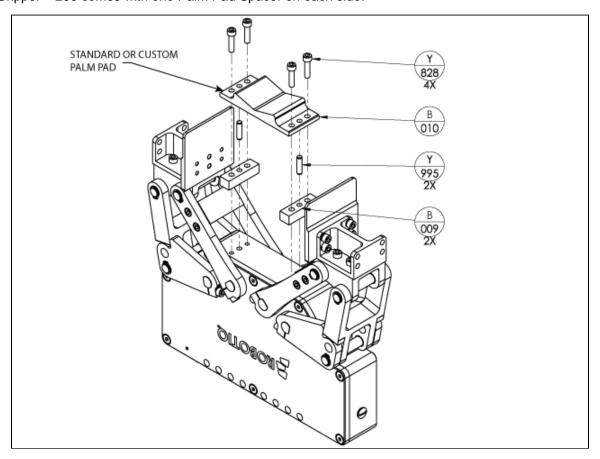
Palm Pad B-010 assembly.
